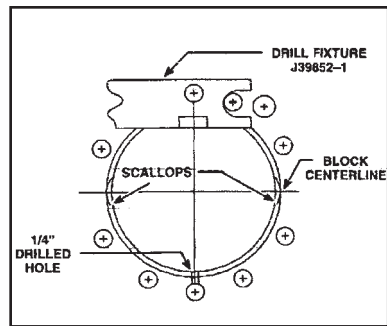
Rotate the mounting plate 180° until it lines up with the next set of cylinder head bolt holes
